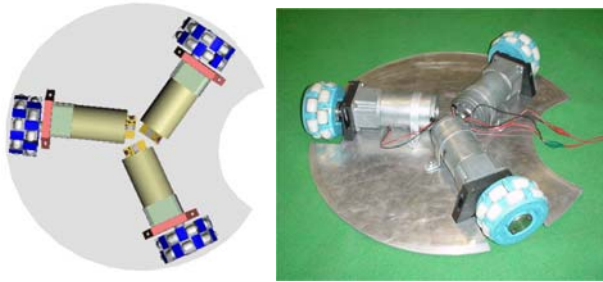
Three-Wheel drive mechanical construction (design and physical)
